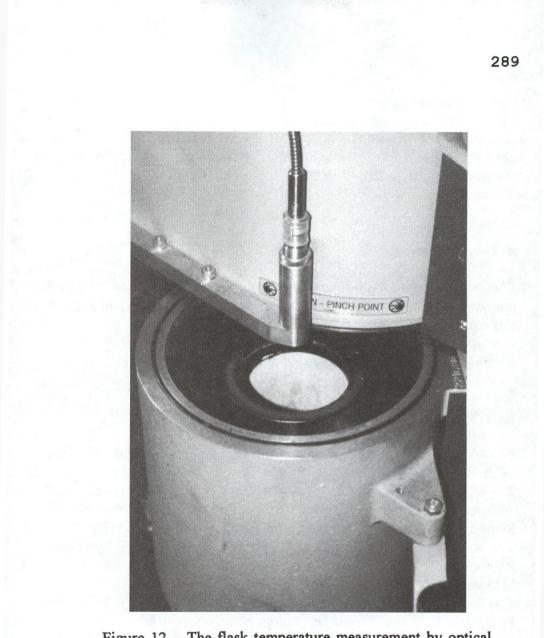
The flask temperature measurement by optical pyrometry in the casting machine
